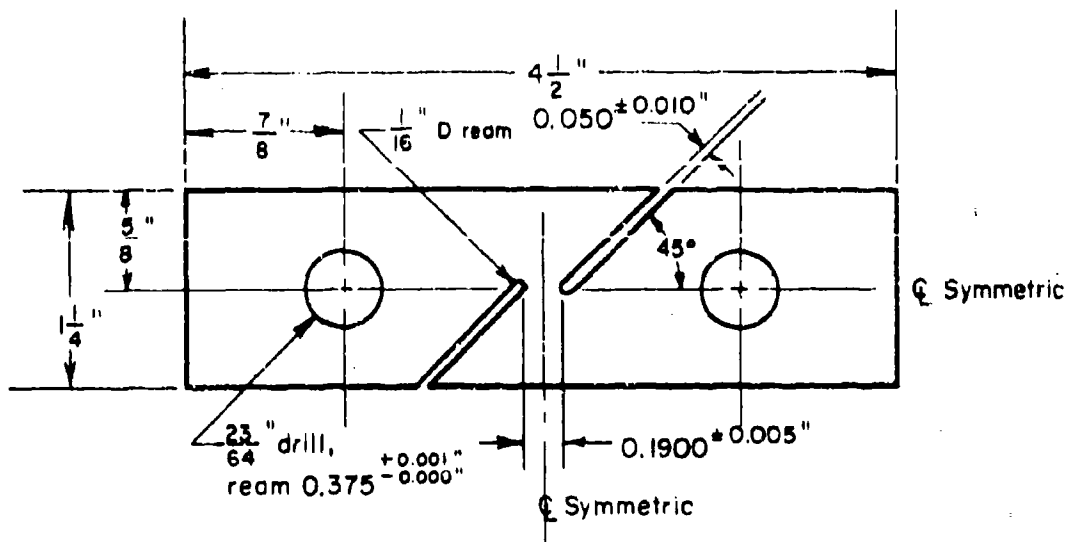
SHEET SHEAR TEST SPECIMEN
